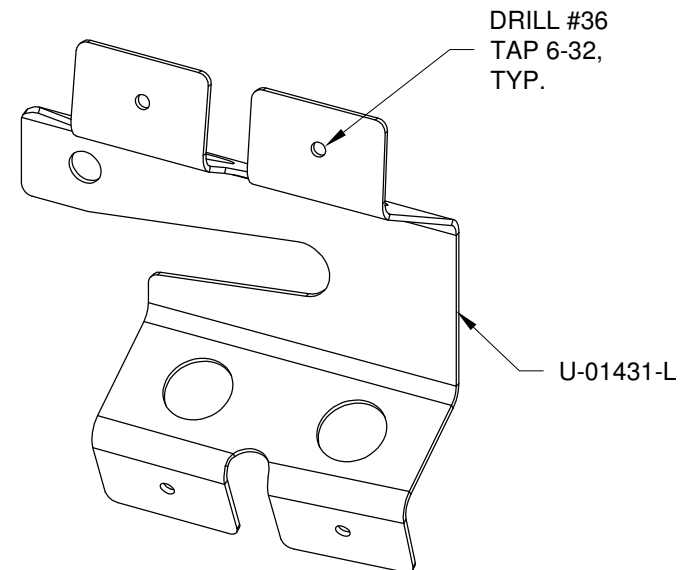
ENLARGE AND TAP HOLES IN NOSE WHEEL FAIRING BRACKETS
